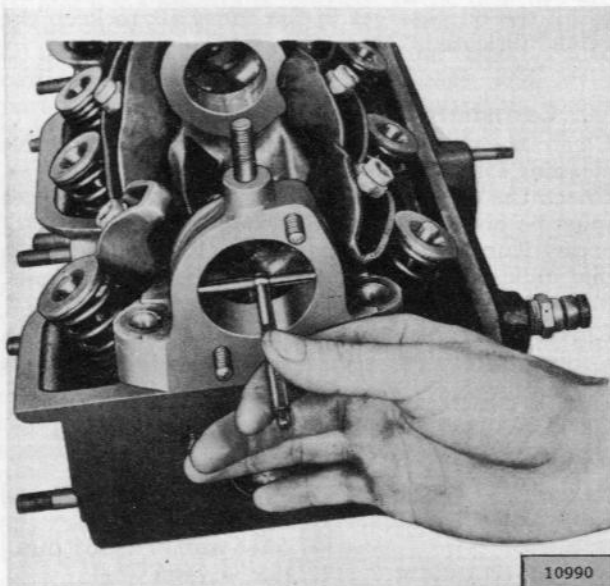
CHECKING BEARING DIAMETER OF CAM BEARING SUPPORT DECK
